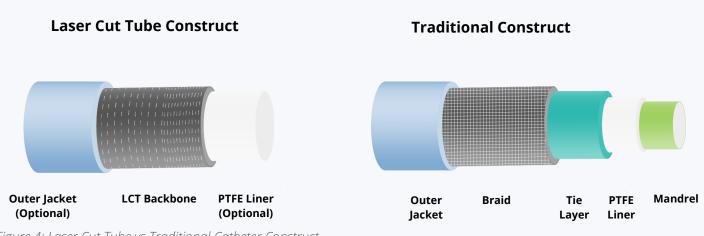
Laser Cut Tube vs Traditional Catheter Construct.
